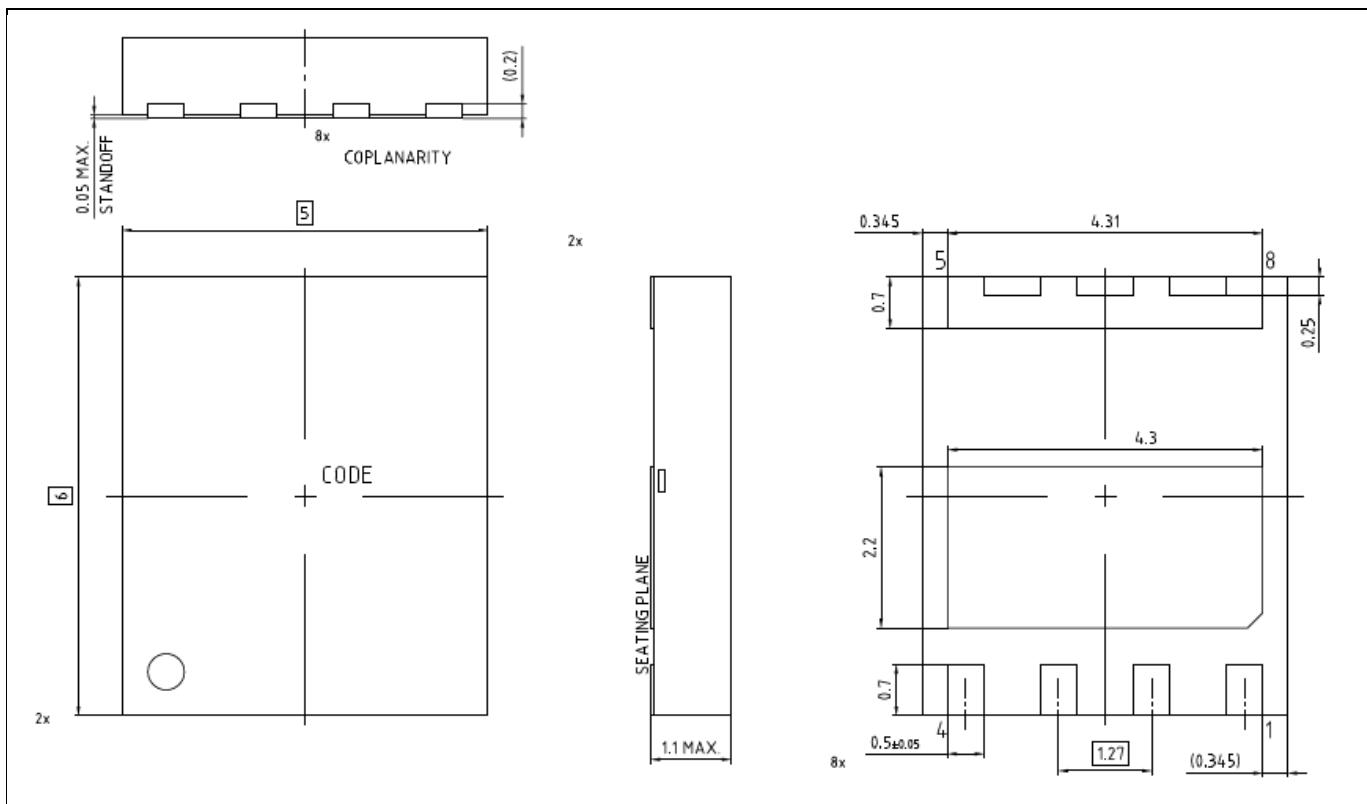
PG-TSON-8-7 Package Outline, dimensions (mm)
